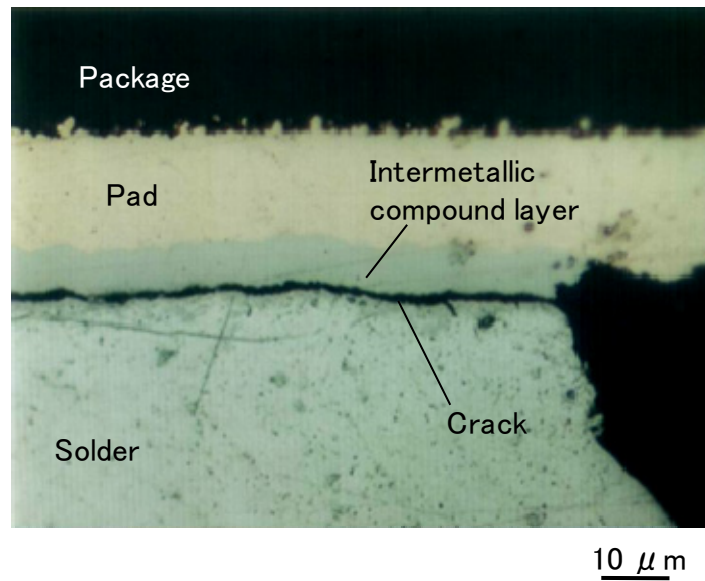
19 Cross section of failure in a solder joint.
